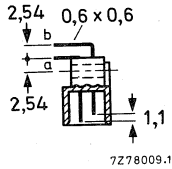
90° angled dip-solder pins, with protruding earth contacts.
